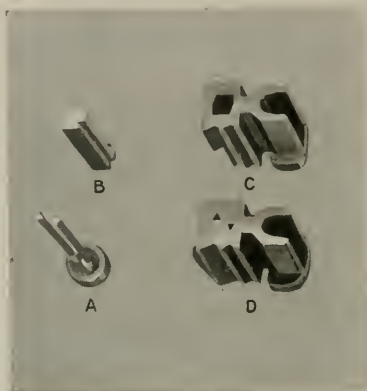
Shedder, insert, and perforator punch for solderless cord tip punch and die
